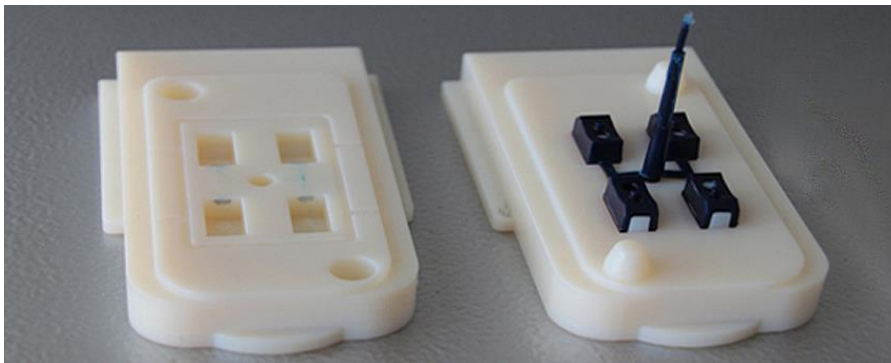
Example of 3D plastic mold insert and respective molding part.
